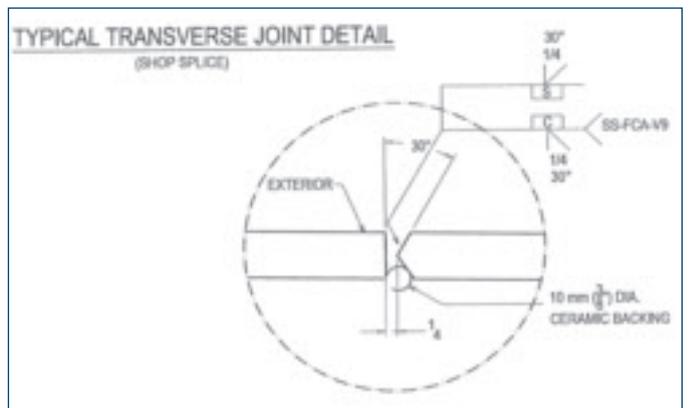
Outline of the numerous transverse welds that were used to join each plate in shop and modular section during field erection. (Illustration courtesy of Mariani Metal.)
